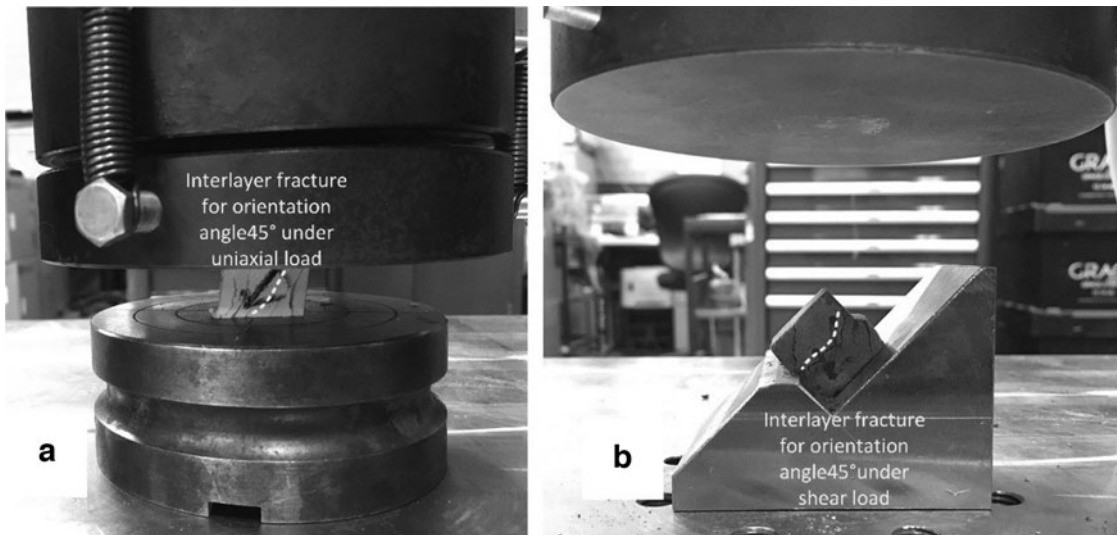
Fractures in the printed 45° specimens in both (a) compressive test for ZP 151 and (b) shear test for CP.
